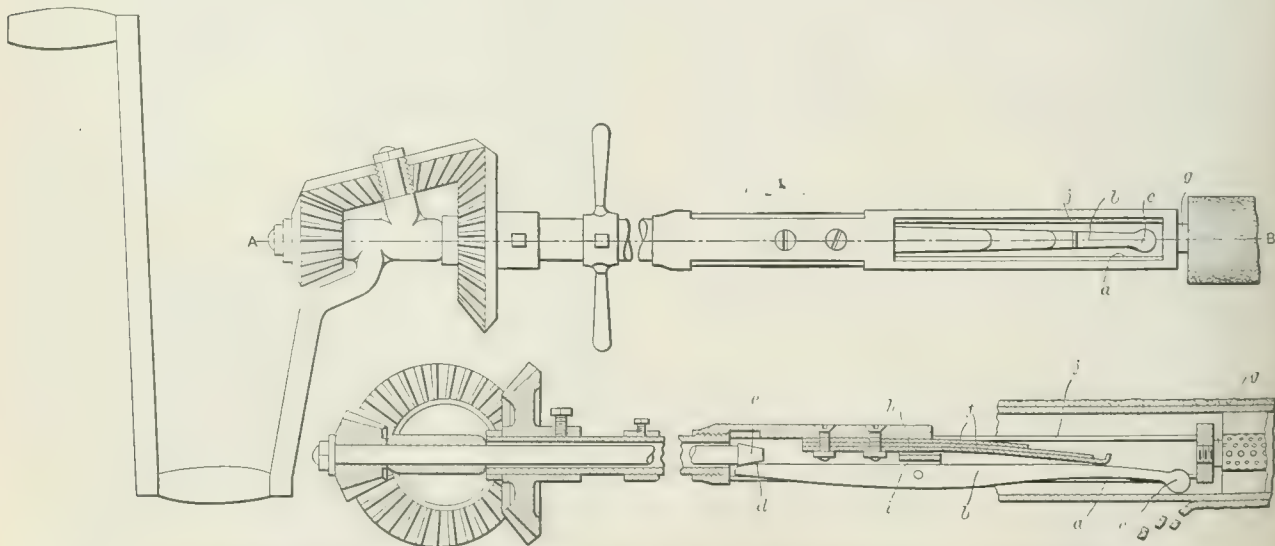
Elevation and Longitudinal Section of the Baker Hammer Flue Cleaner Made by W. J. Baker, Oswego, N. Y.
